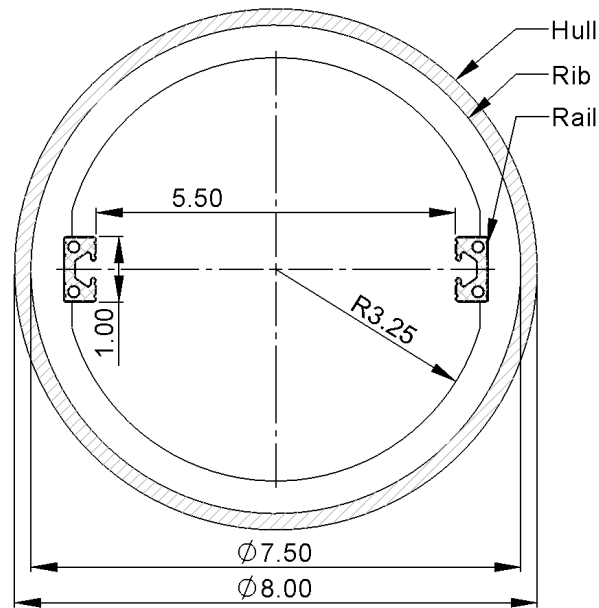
Cross sectional view of the hull. With the ribbing the space to package components narrows down roughly to a 6.5” diameter circle with side mount points at 5.5” apart.
